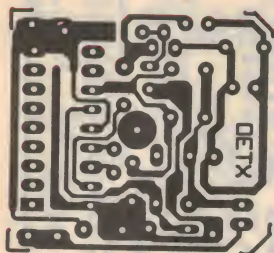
The layout for the receiver/decoder PCB is shown here. The receiver module solders directly to the PCB with the components facing in. Fit the links first, then follow with the passive components.
